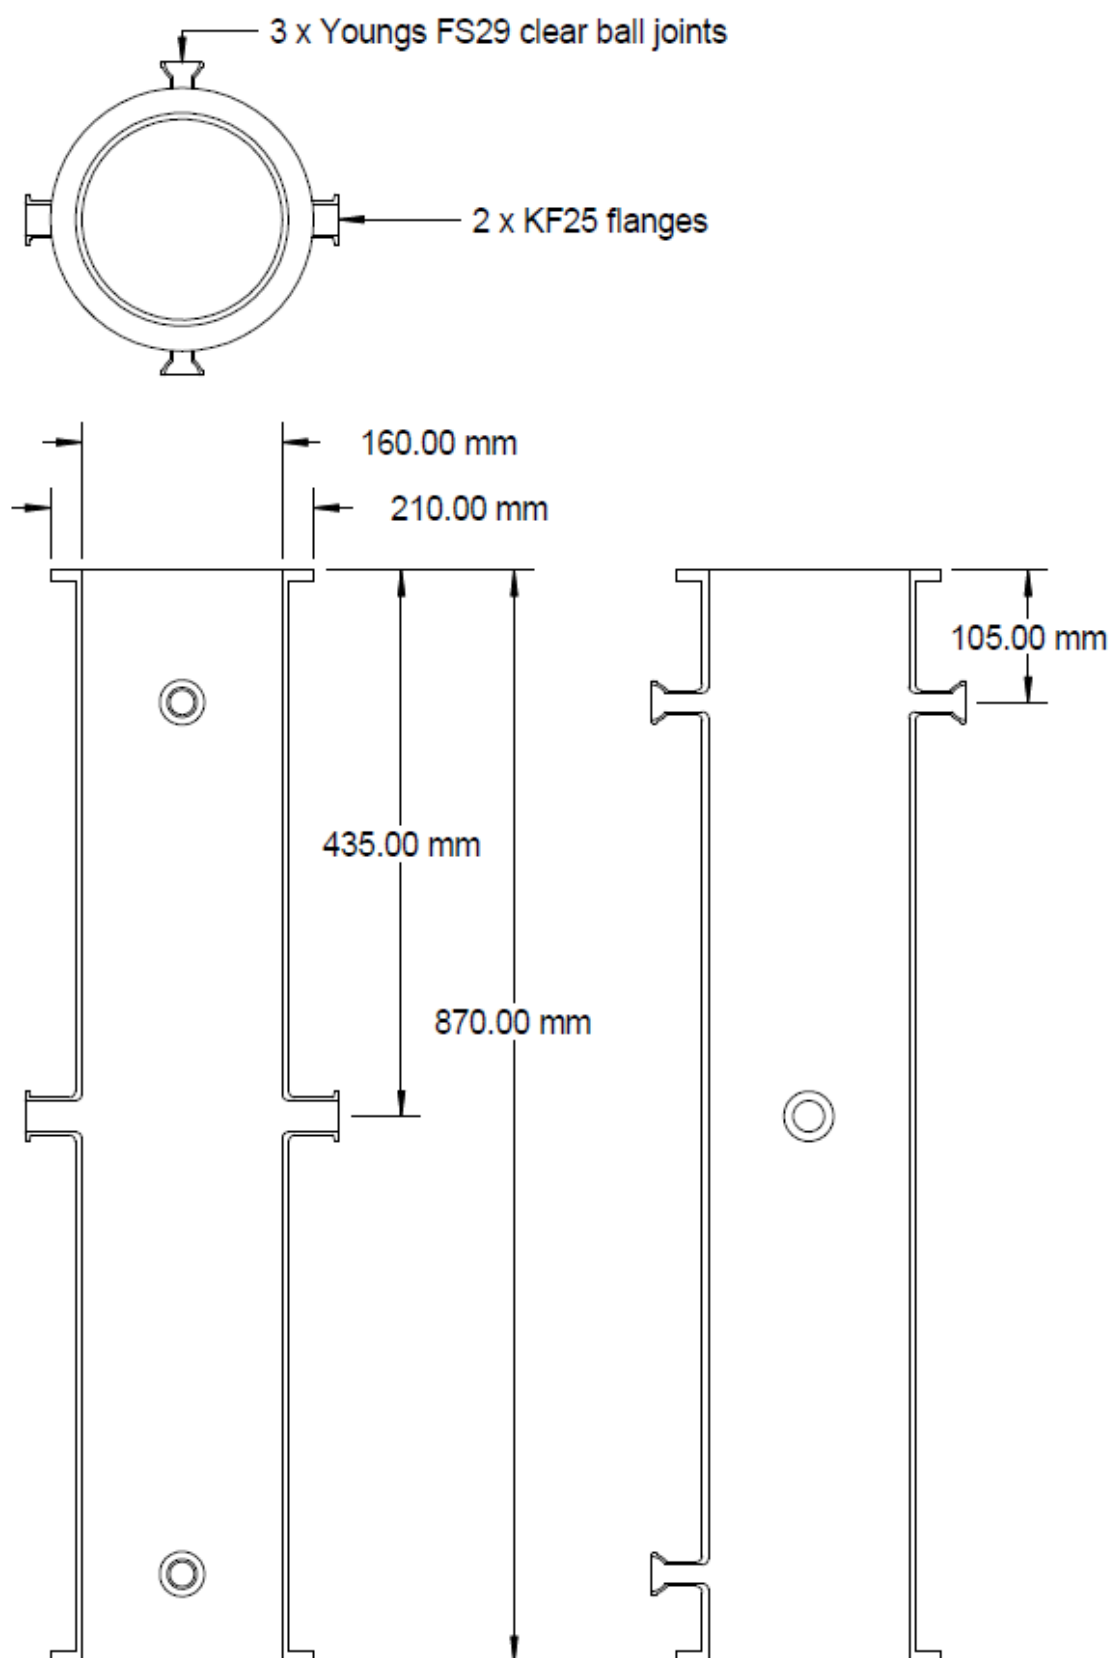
Dimensions and fittings of the glass vacuum cell, produced by Glass Solutions¹⁵
